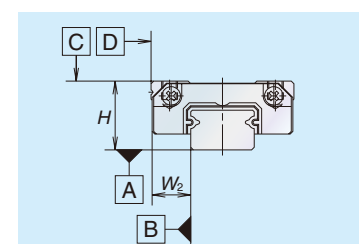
Drawing for accuracy standard (Mounting width W_2)
